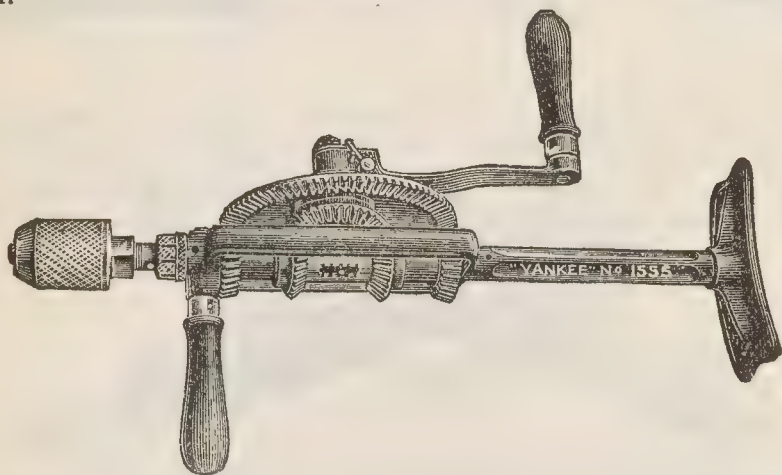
,201.—“Yankee” double speed breast drill with three jaw chuck holding up to $\frac{1}{2}$ in. straight shank drills. It has two speeds, right and left ratchets and continuous ratchet; also direct drive.
